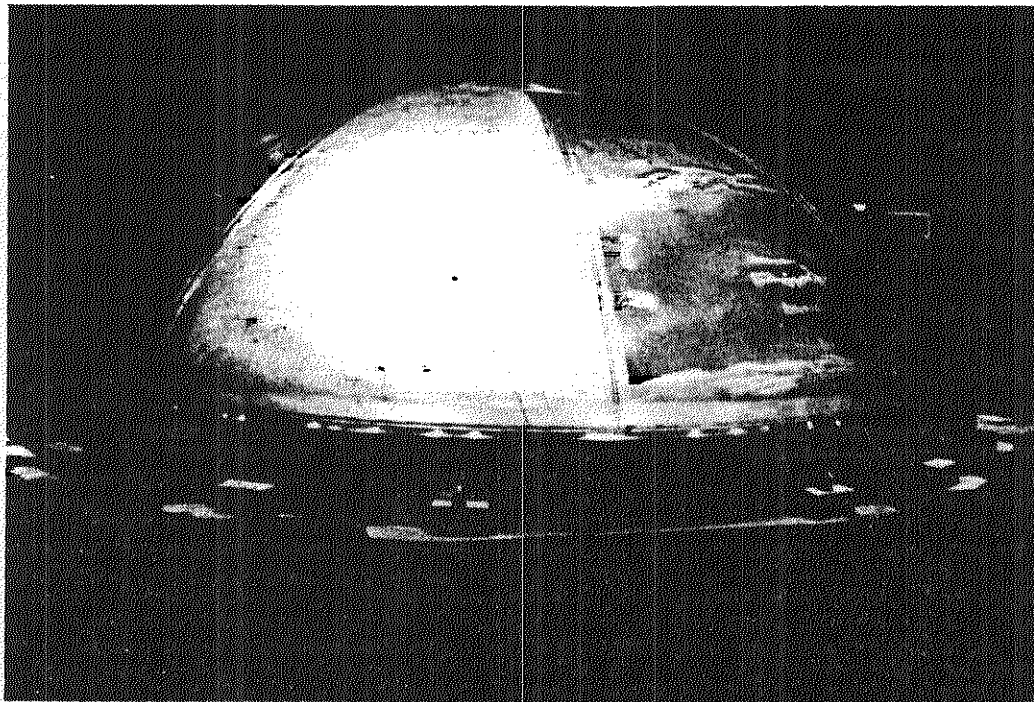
First Tank Dome Peen Formed on the IBF Plant (Photo: Dornier)
